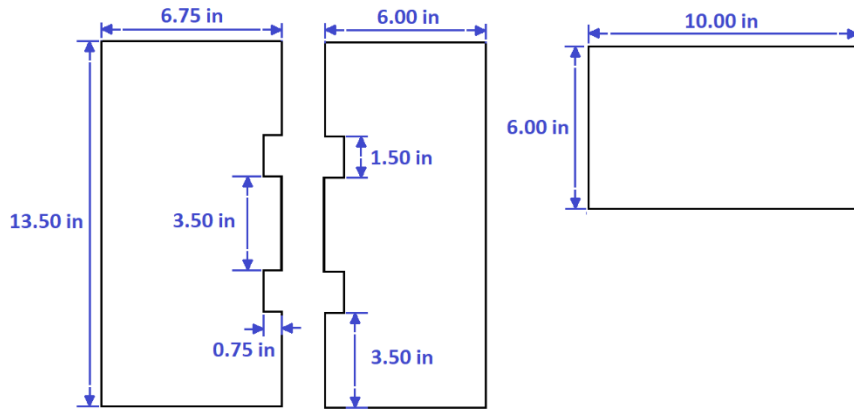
The plexi-glass sheets that cover the tops of the bottom and top boxes. The two sheets on the left cover the bottom box. The sheet on the right covers the top box.
